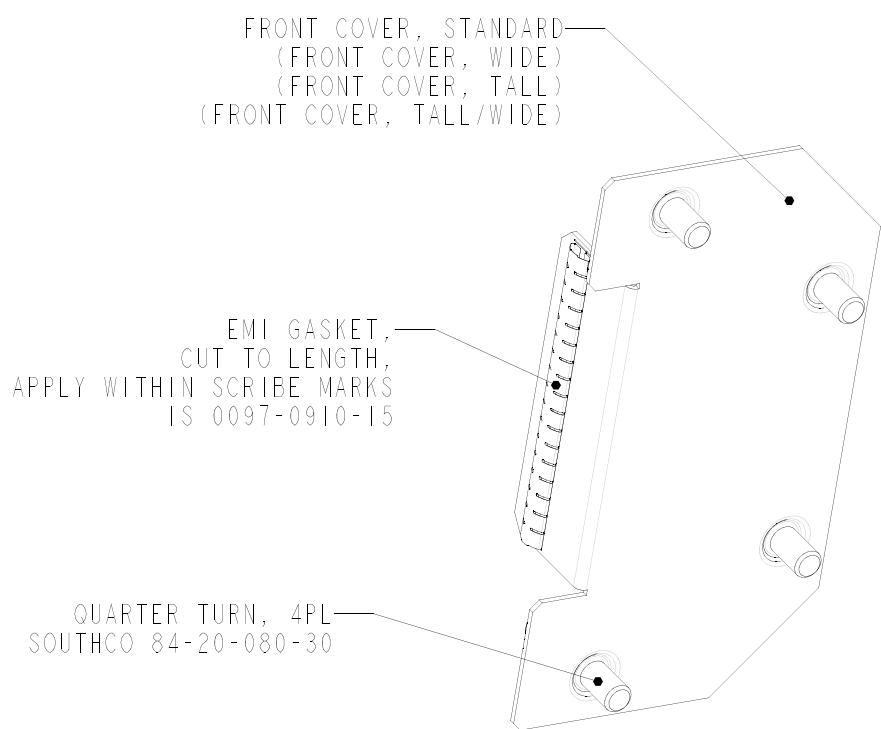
Front Cover Assembly - Standard; Wide; Tall; Tall/Wide
